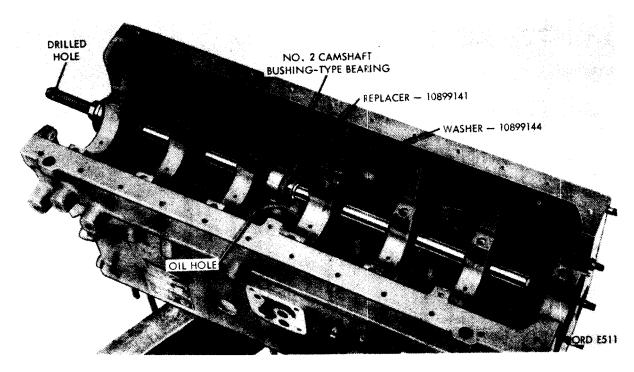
INSTALLING NO. 2 CAMSHAFT BUSHING-TYPE BEARING.
